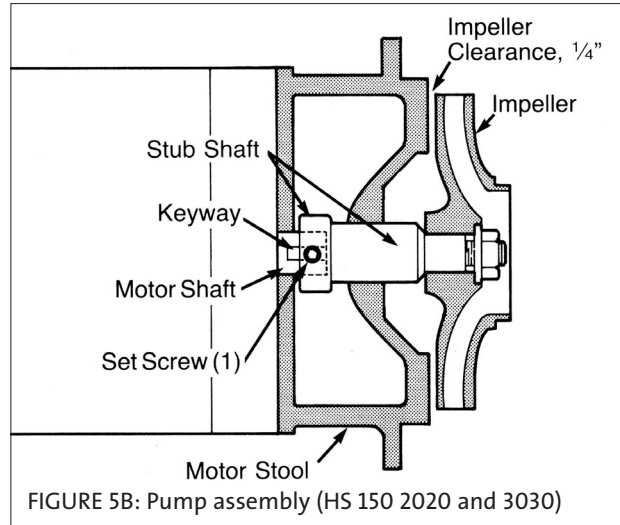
B: Pump assembly (HS 150 2020 and 3030)
